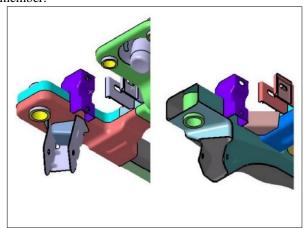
Modified front member with reduced weld area (Right)
